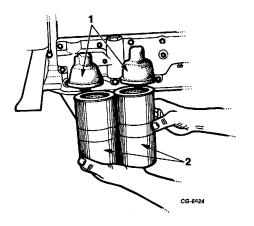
Oil Filter Installation1. Oil filter base2. Oil filter
